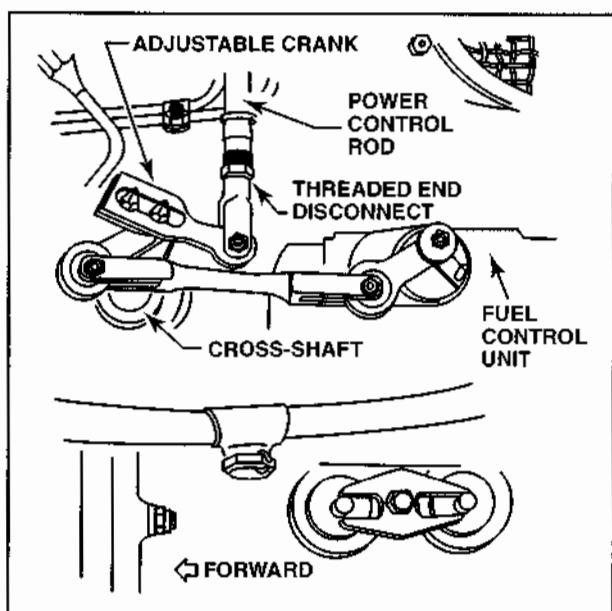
On engines controlled by a single power lever, you must separate only one control rod and end before you remove the engine. When removing a turboprop engine, disconnect the power lever, condition lever, and propeller controls.
